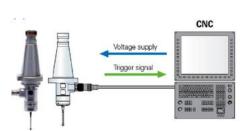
Cable (hard-wired) signal transmission 3D touch probes for machine tools. *From Heidenhain
